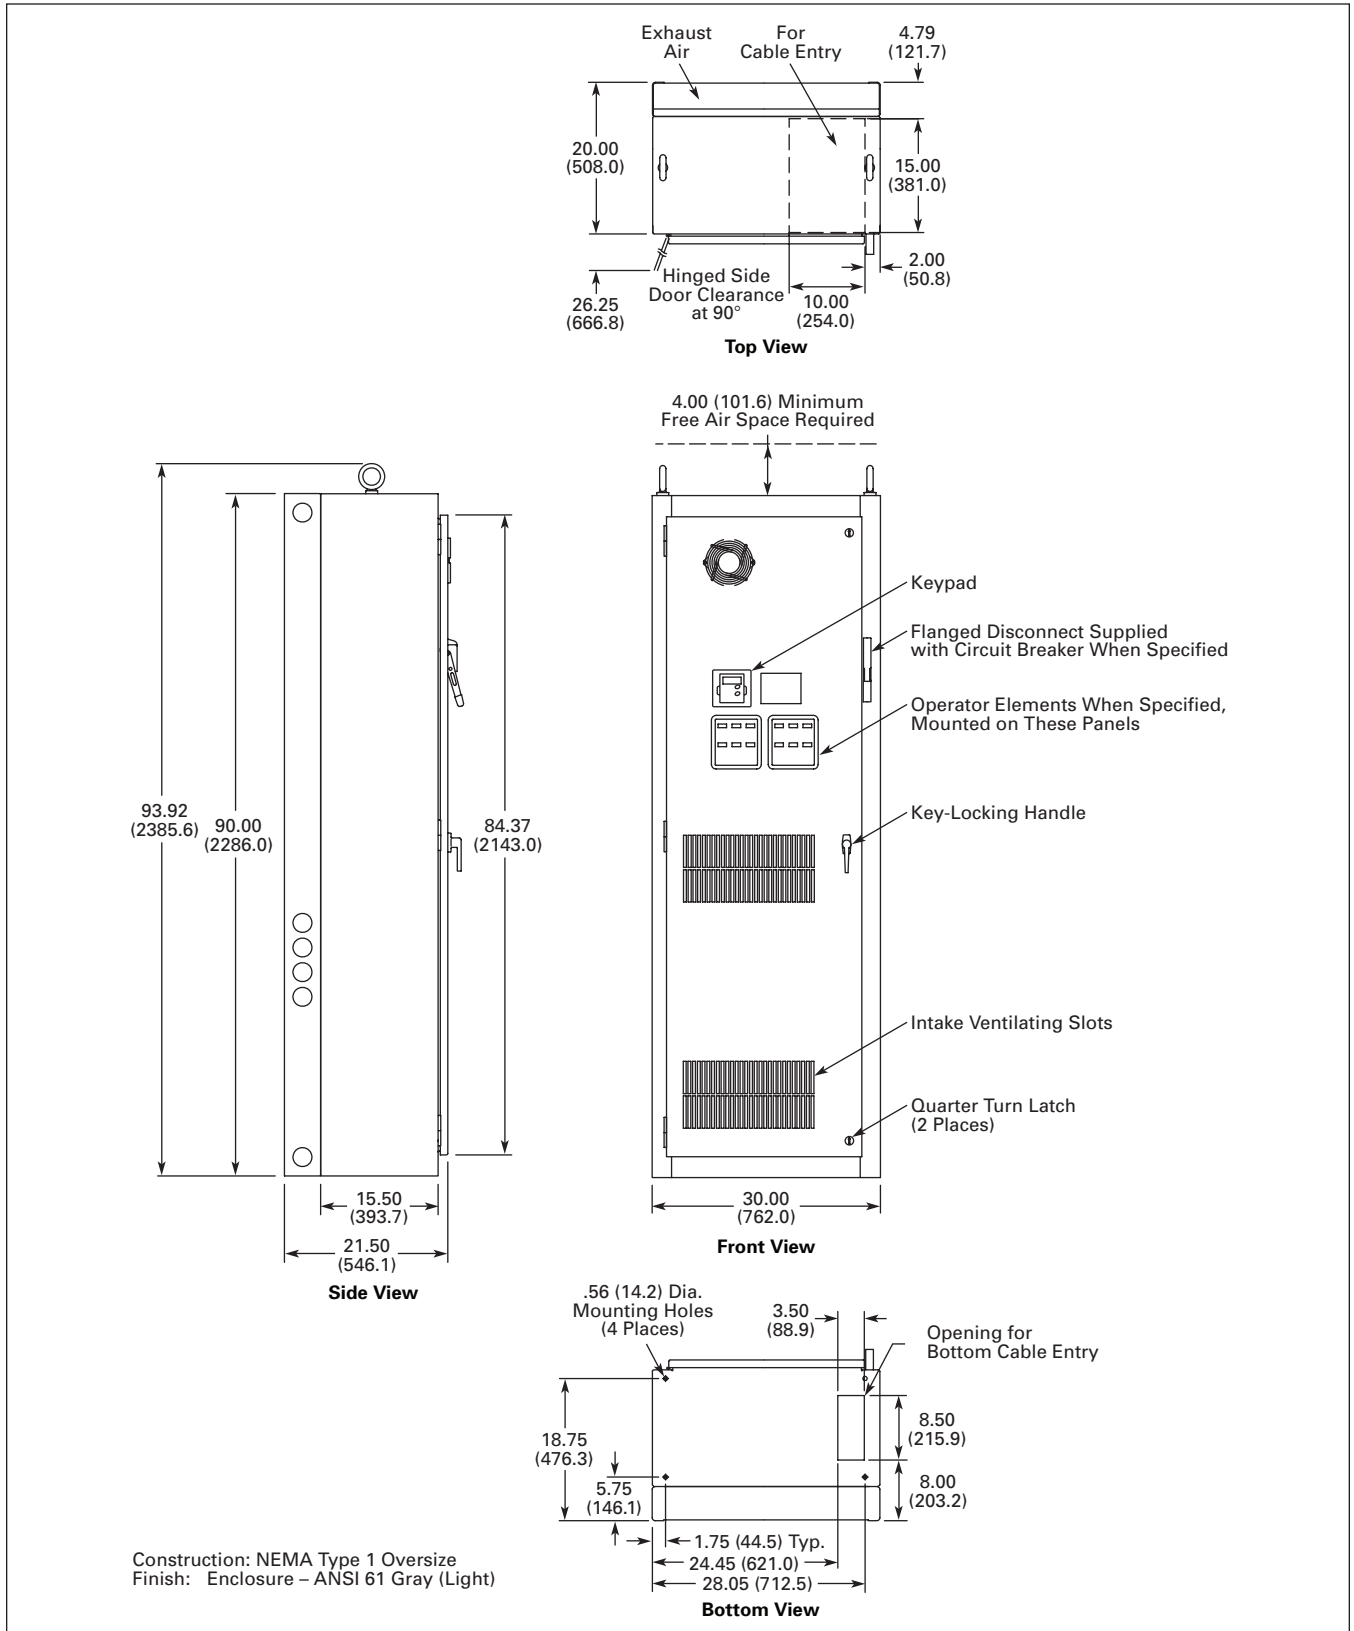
Enclosure Size 7, 25 – 150 hp VT/25 – 125 hp CT — Approximate Dimensions in Inches (mm)
